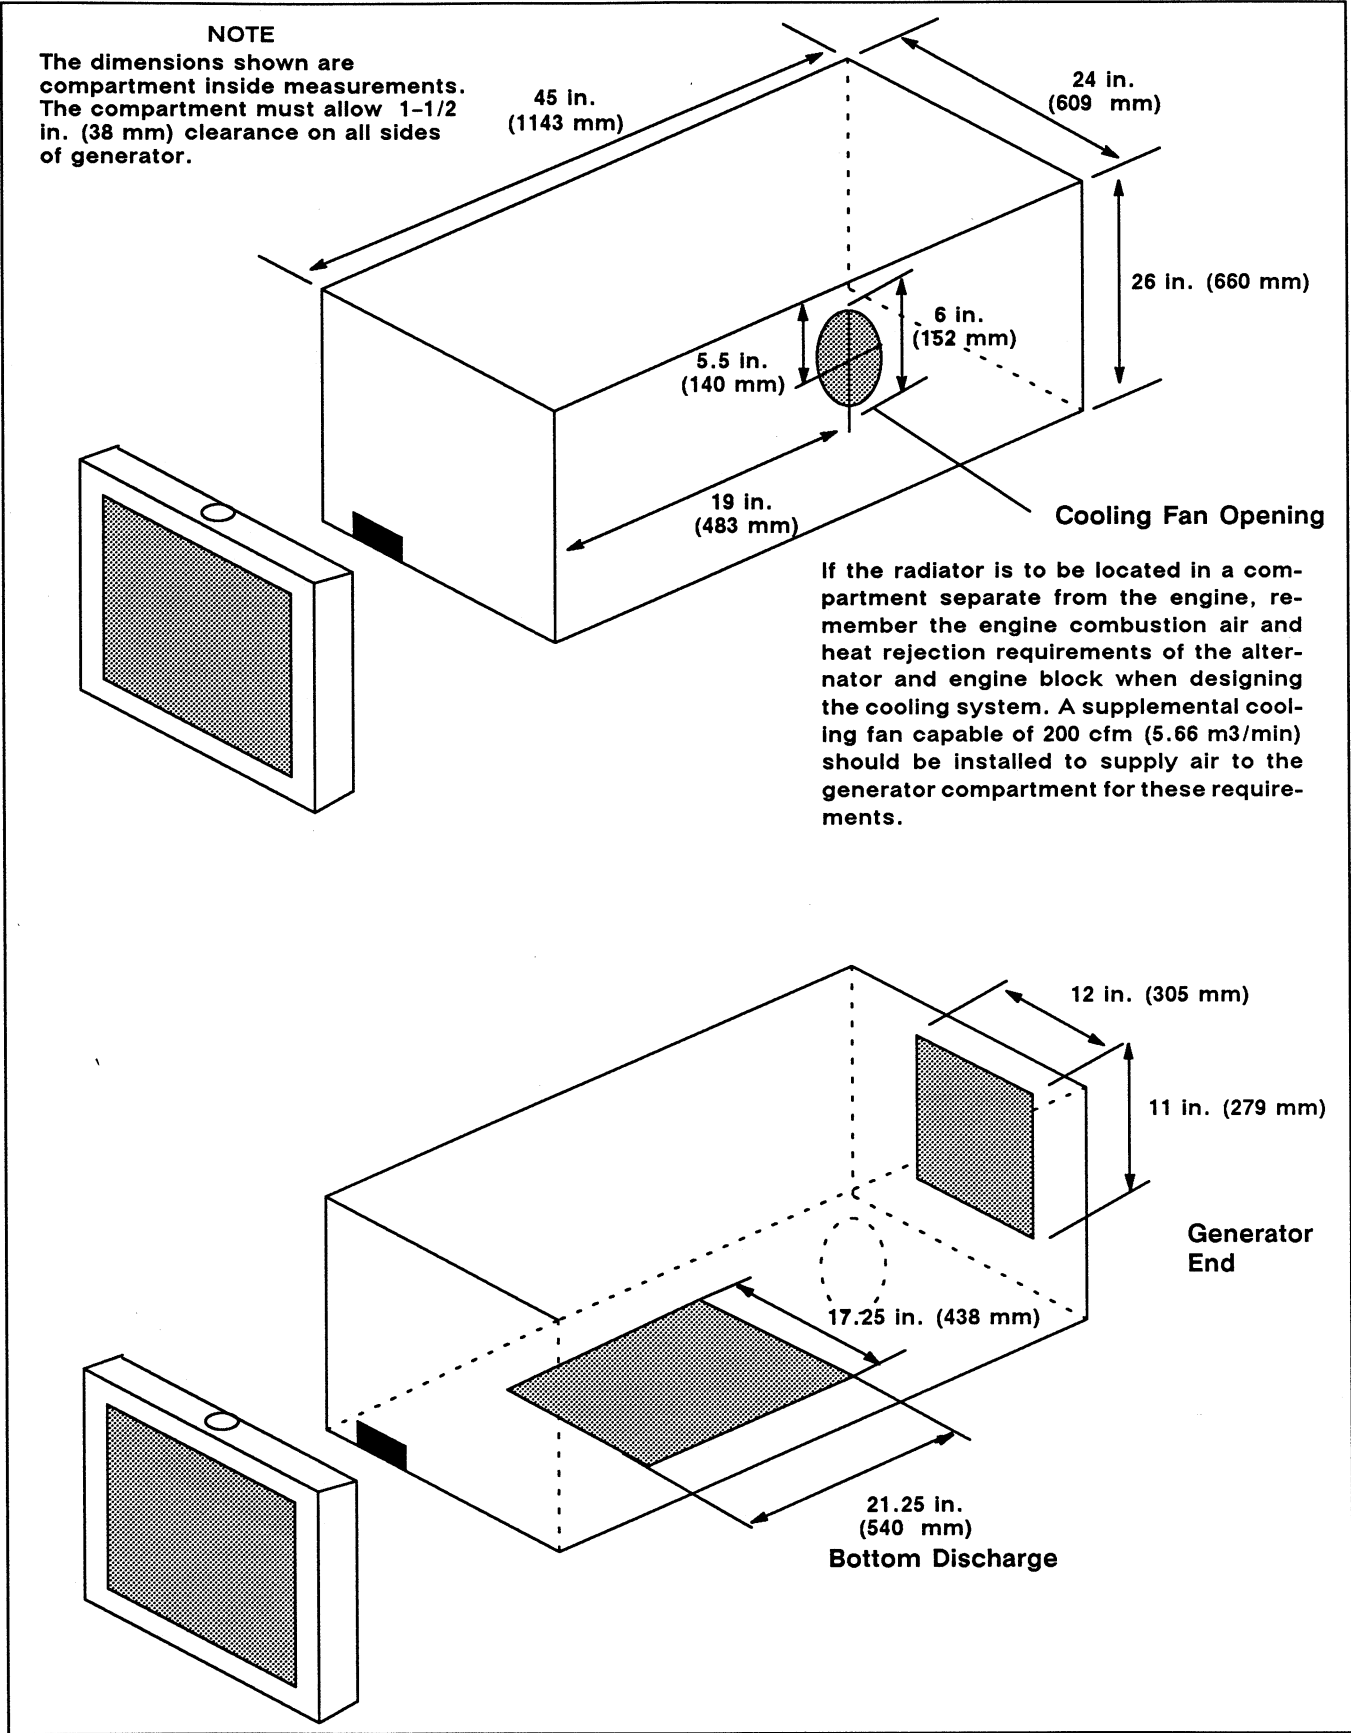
Typical Cooling System Installation - Remote Radiator Mounted Outside Generator Compartment
